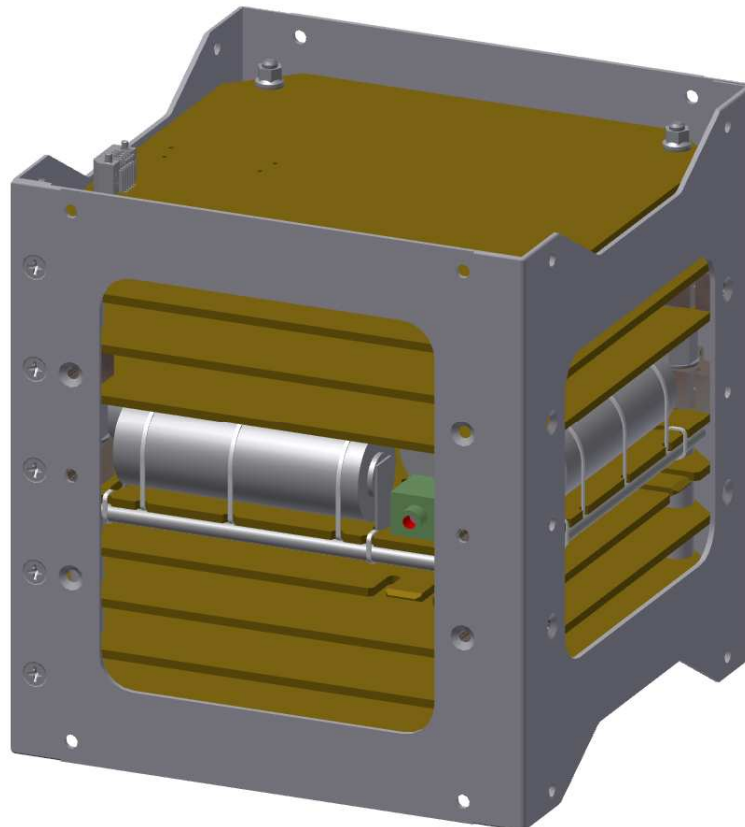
Fox-1 bare spaceframe with centrally mounted PCB stack.
